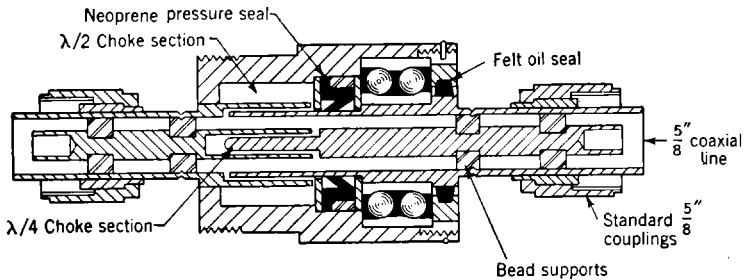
10-cm bead-supported rotary joint for $\frac{5}{8}$ -in. line.
